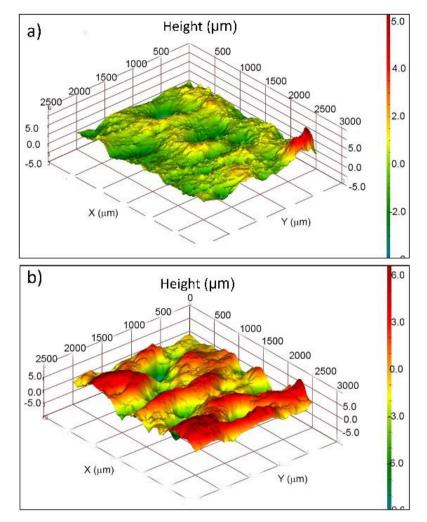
3D surface profile of test specimens: a) 1st sample, b) 3rd sample
